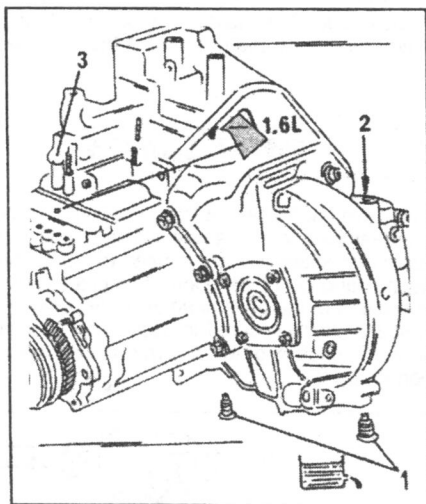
The location of drain plugs (1), oil dipstick (2) and oil filler plug (3).
